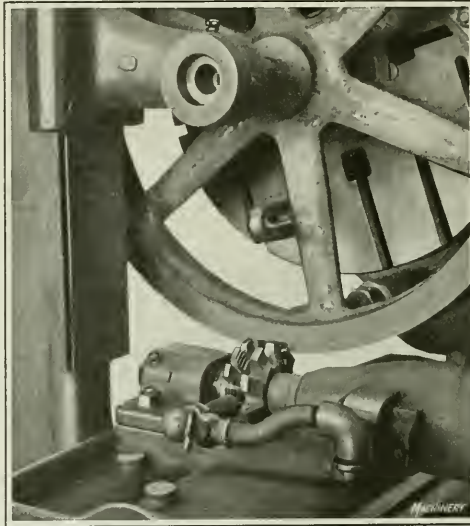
Machine equipped with Two Cutters for taking Roughing and Finishing Cuts simultaneously
